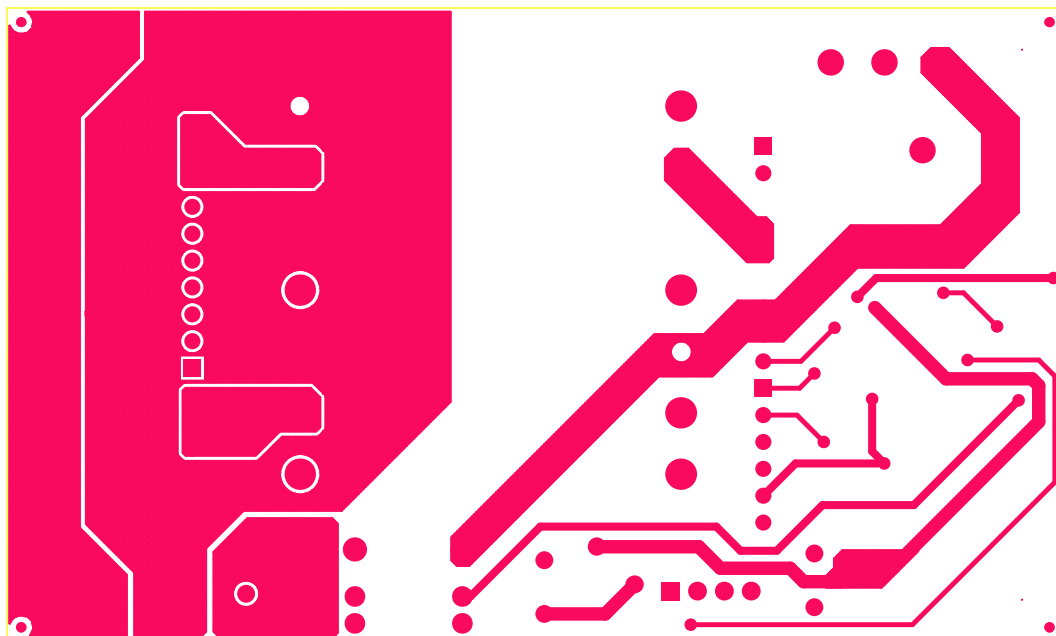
EVLMG1-250WLLC motherboard PCB tracks – bottom side
